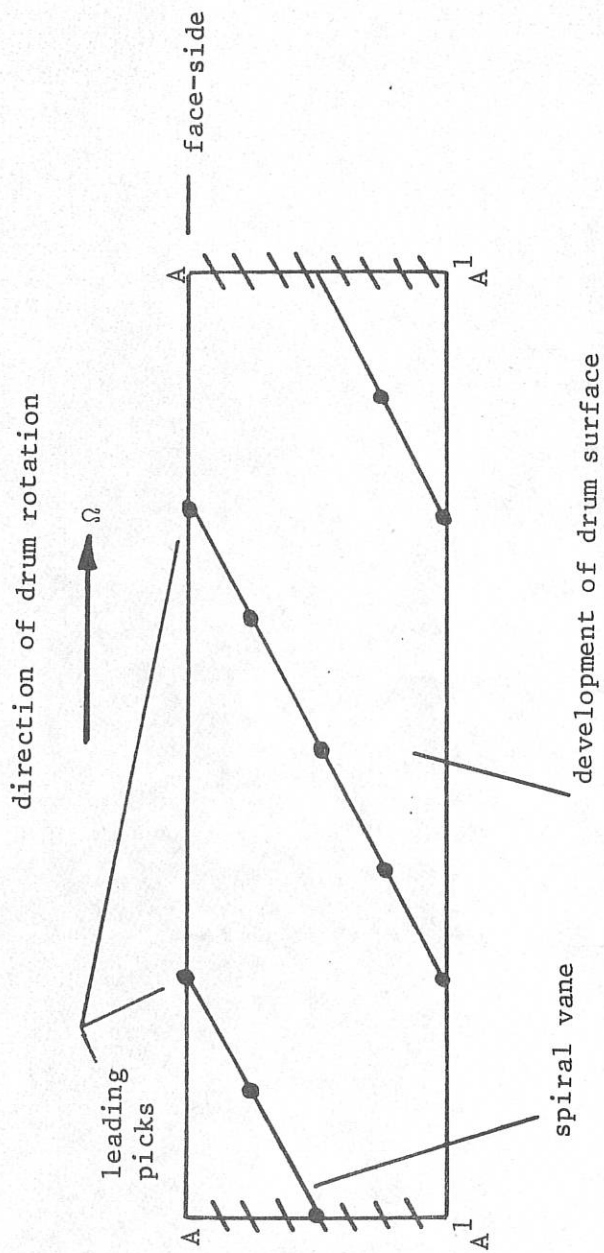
Spiral pick-lacing pattern for a shearer drum
